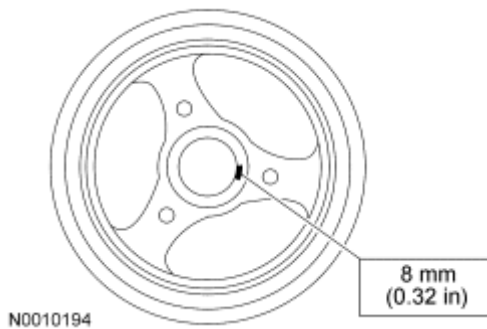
Applying Silicone Gasket And Sealant To Woodruff Key Slot On Crankshaft Pulley
